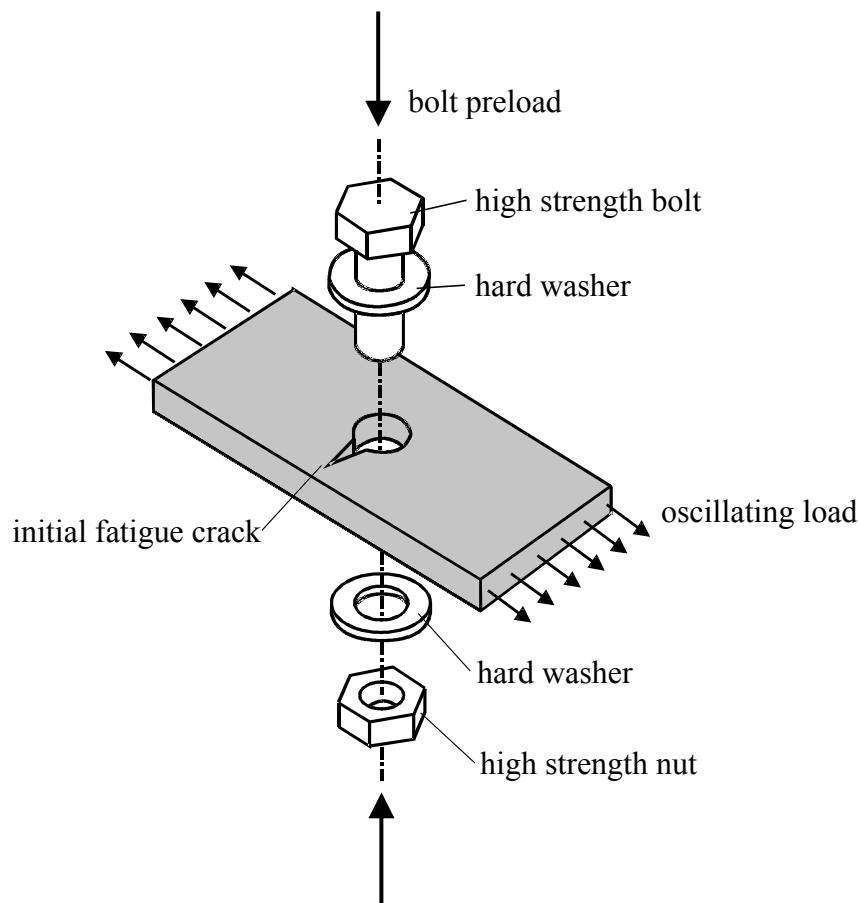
Plate with a hole and an initial fatigue crack
